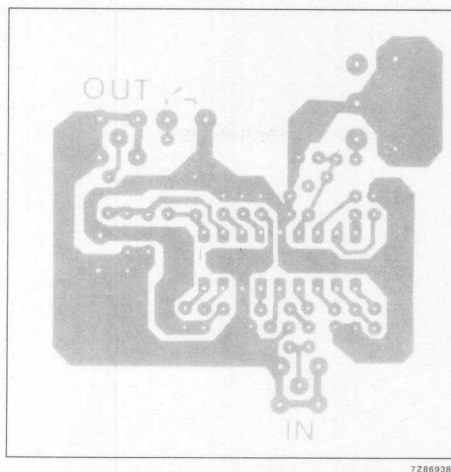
Track side of printed-circuit board used for the circuit of Fig. 4.
